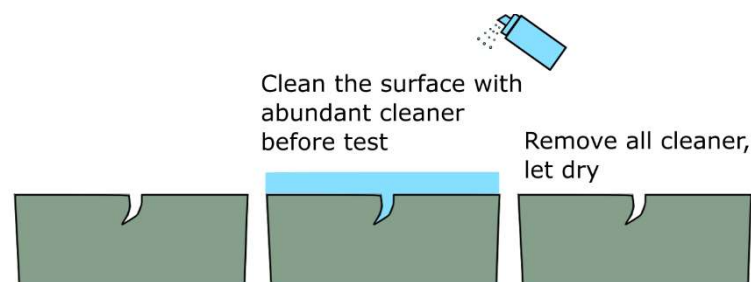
Cleaning of the workpiece (<https://goo.gl/ZcnnLf>)
